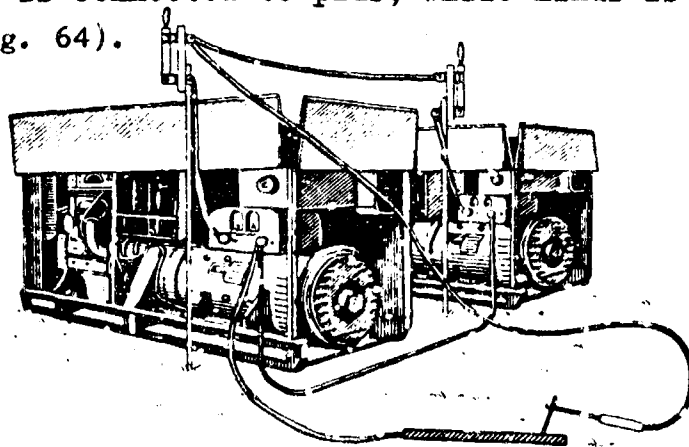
Simplest Connection of Autonomous Welding Unit for Parallel Operation.
